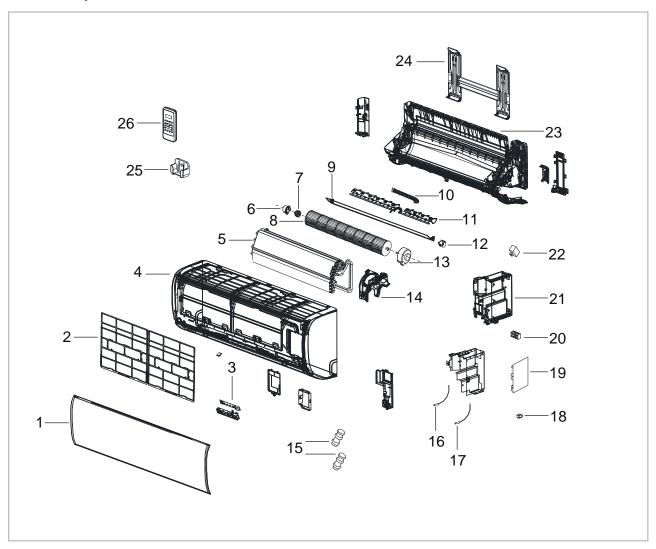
Exploded view of the unit BL 263-353 DC IT
